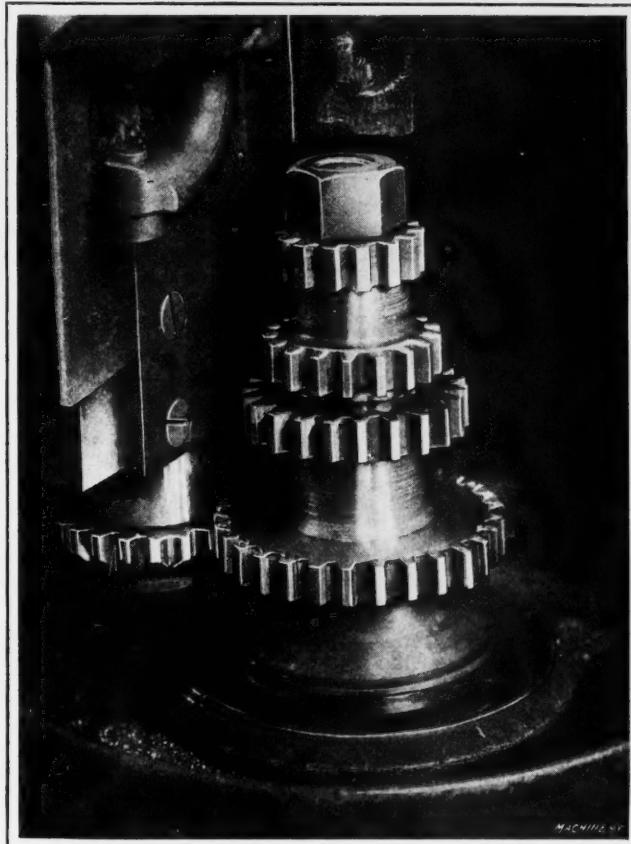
Finish-cutting the Teeth on a Gear Shaper
